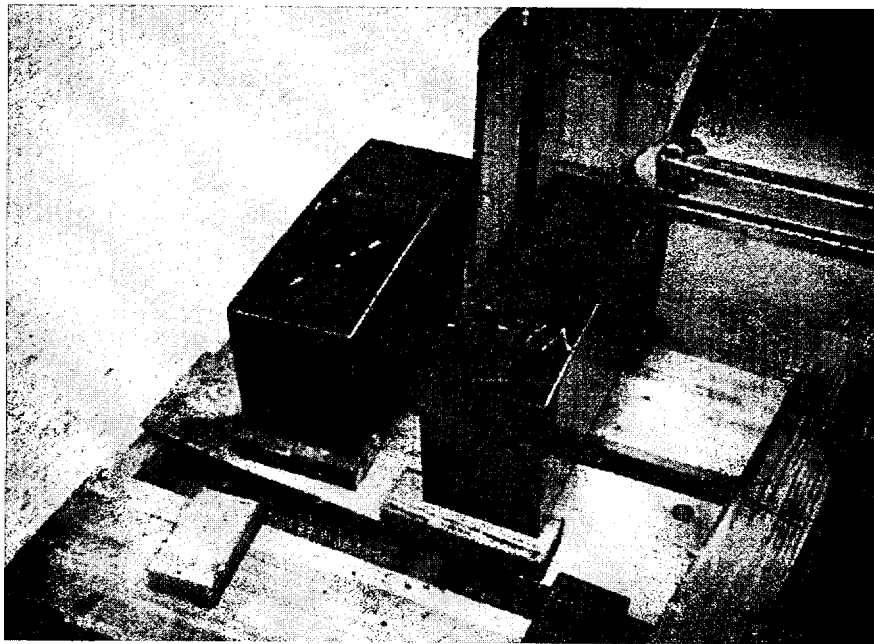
Weld Metal Specimens Removed from PVRUF Block
